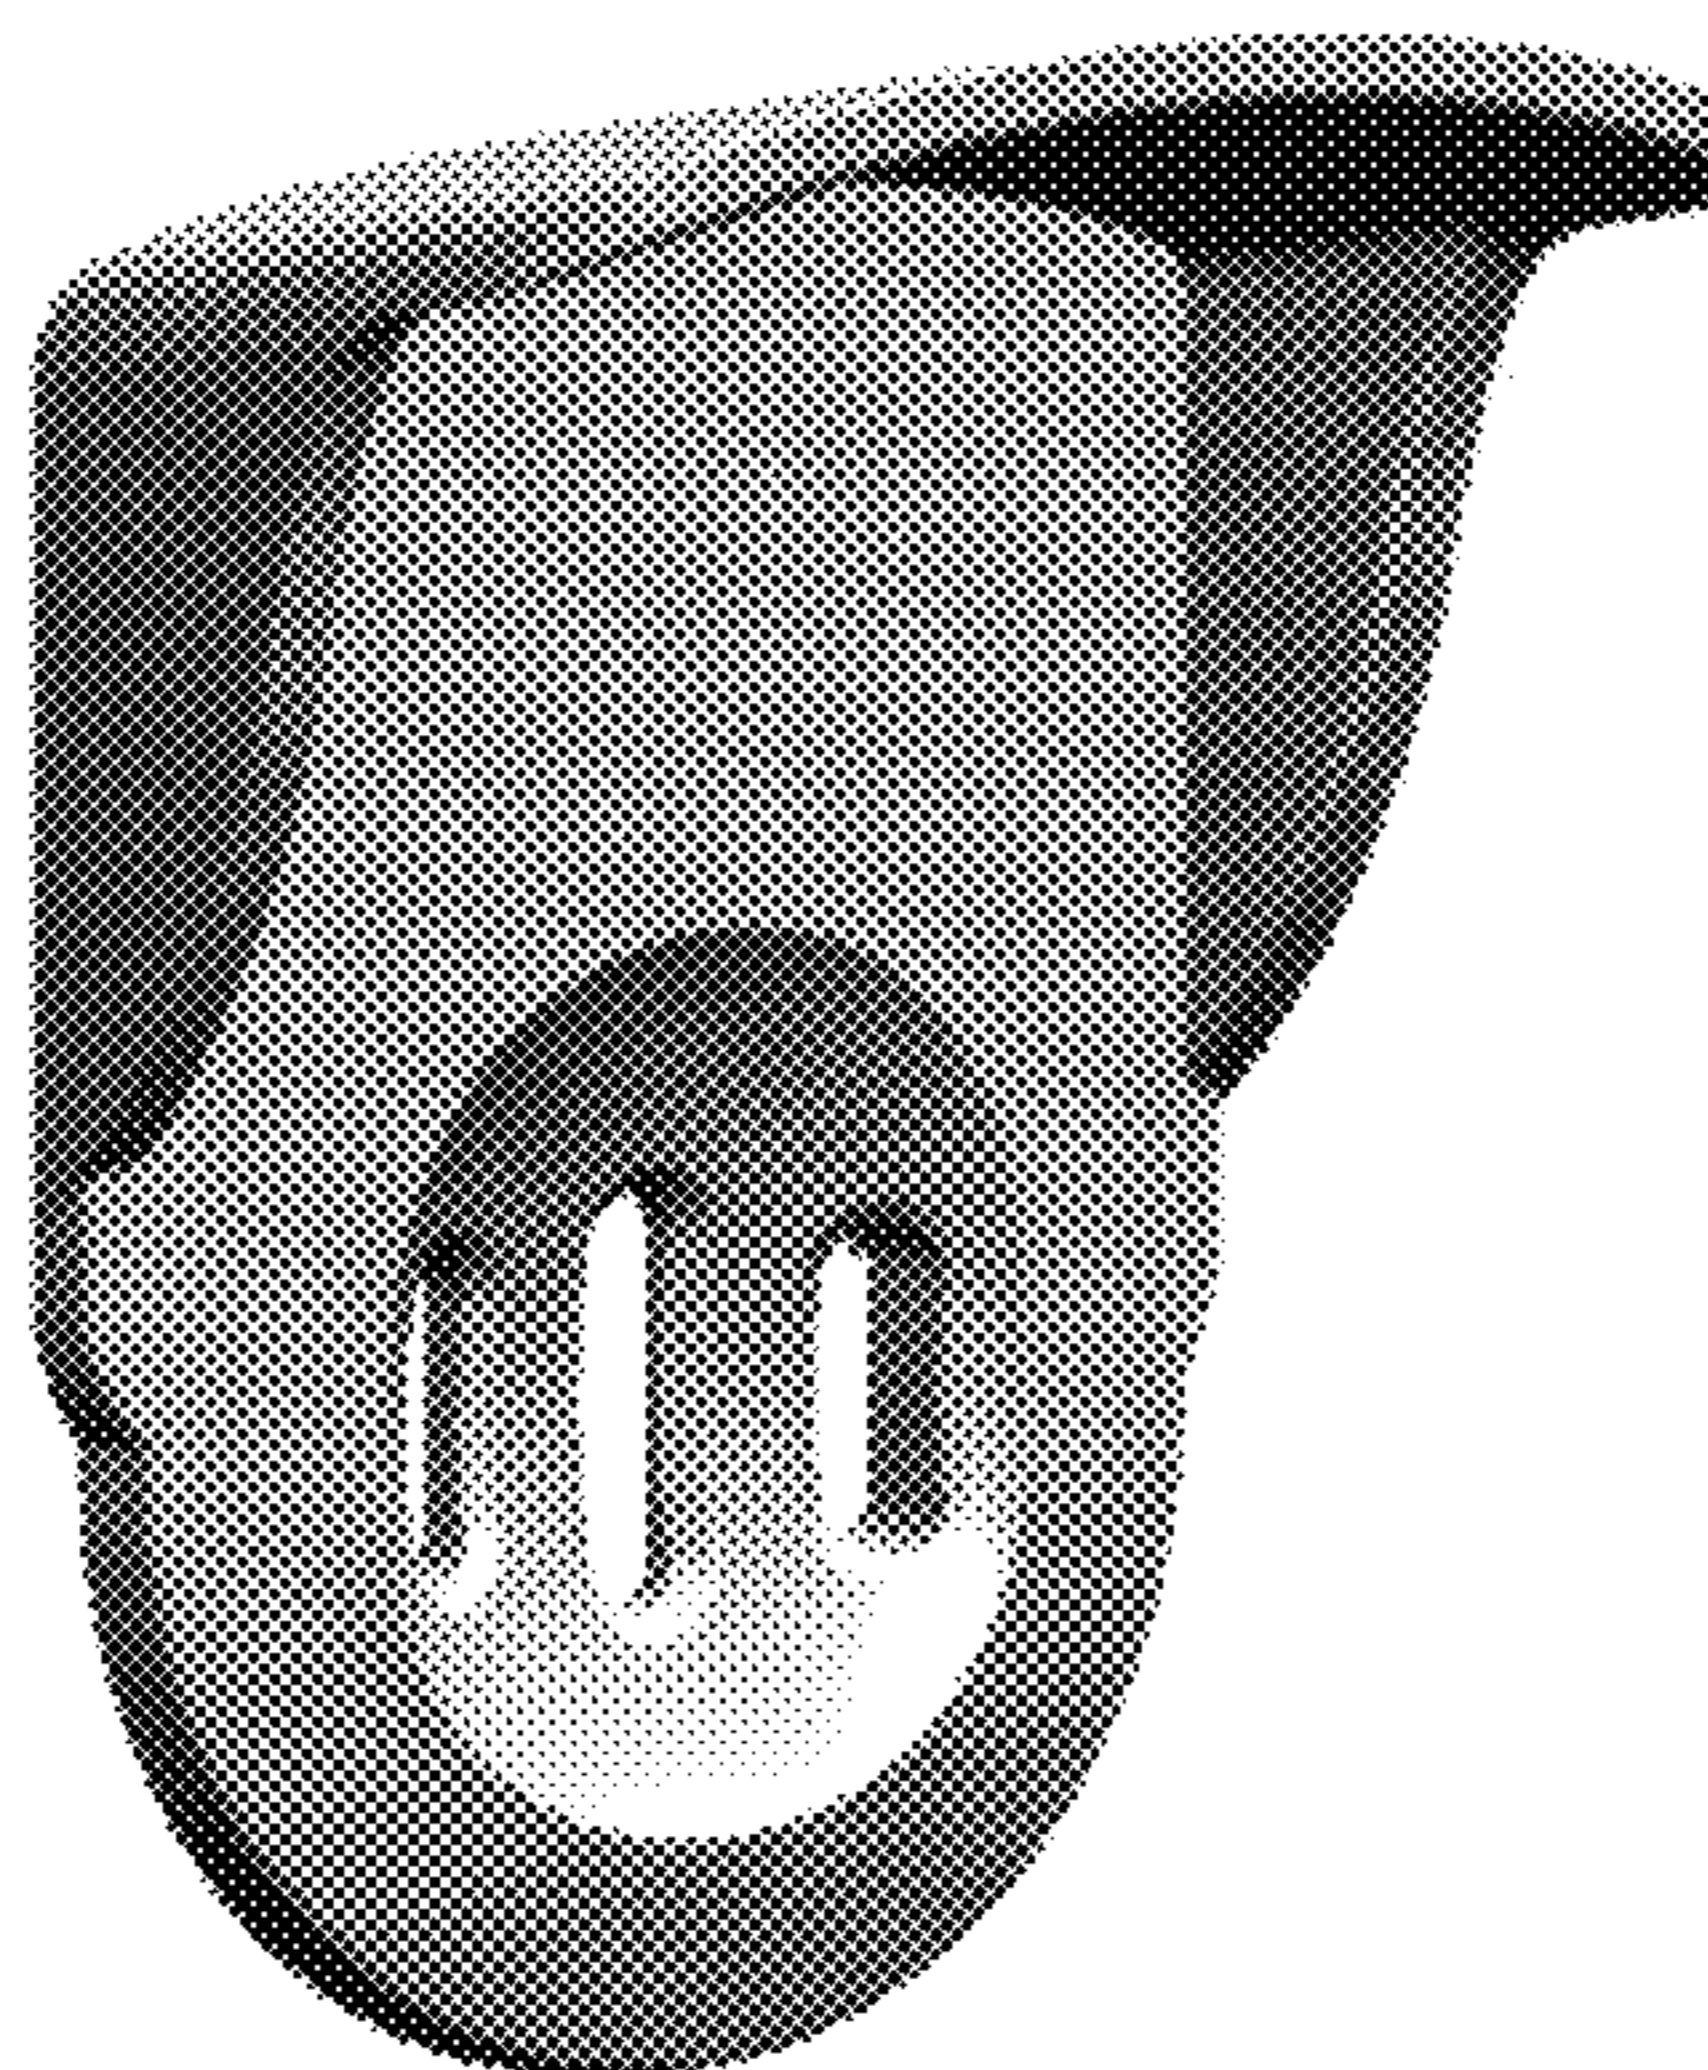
is a left side view of the seed port of FIG. 1, the right side being a mirror image thereof;
